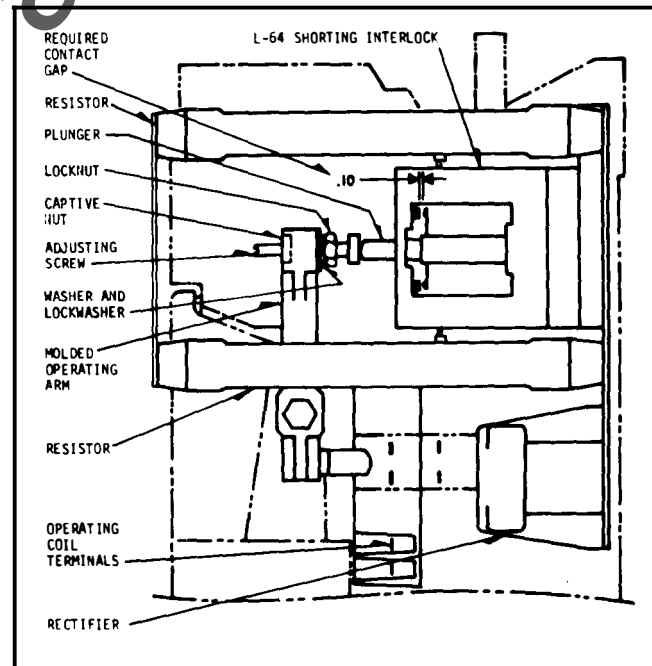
Adjustment of Type L-64 Shorting Interlock (From Dwg. 3512C87)
